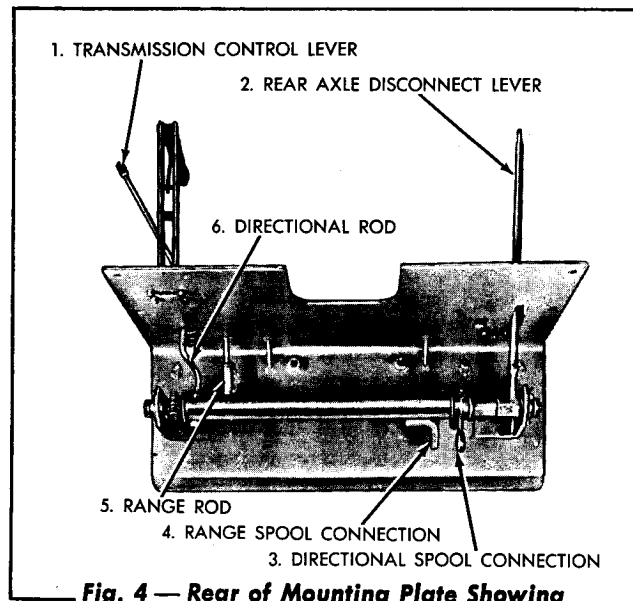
Rear of Mounting Plate Showing Lower Lever Assembly
